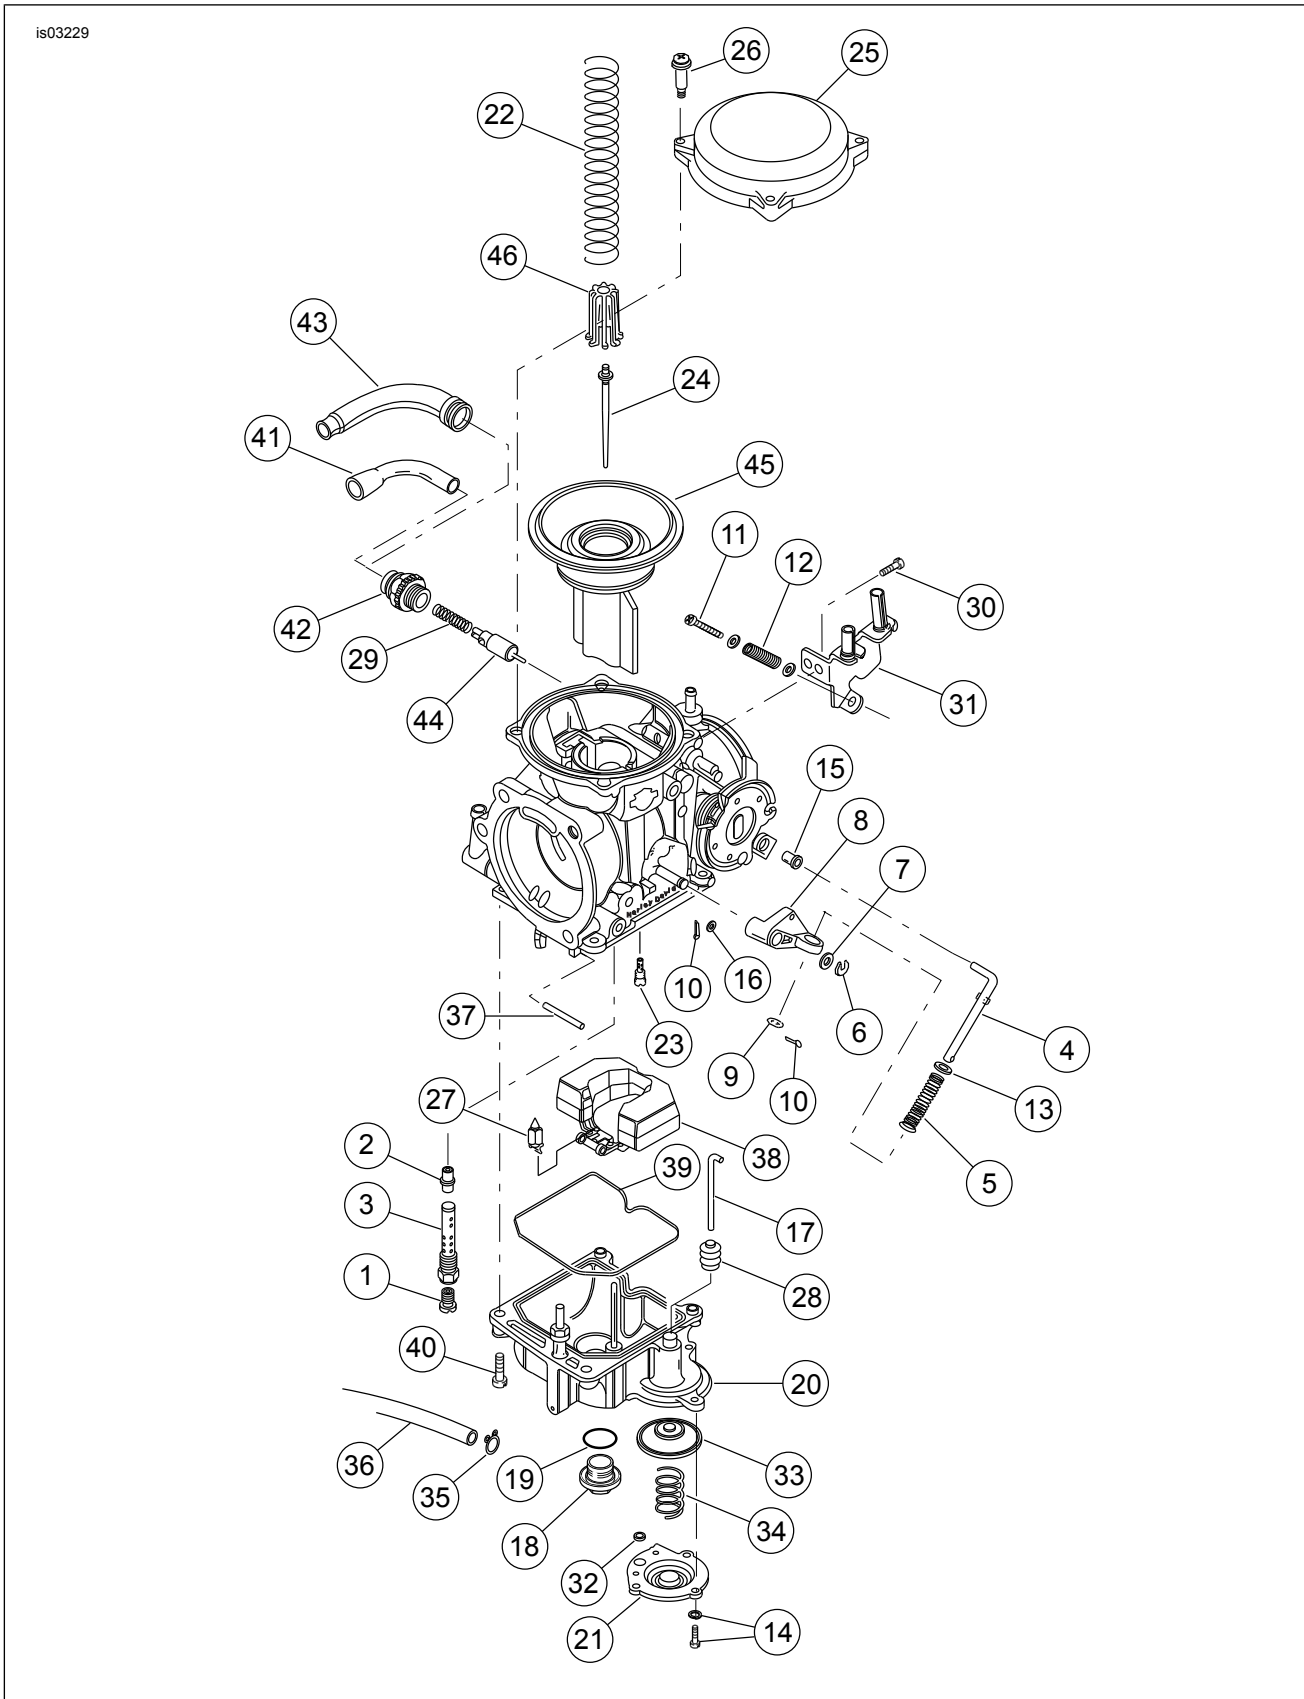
Service Parts: Screamin' Eagle Super Bore 51 MM CV Carburetor Kit
